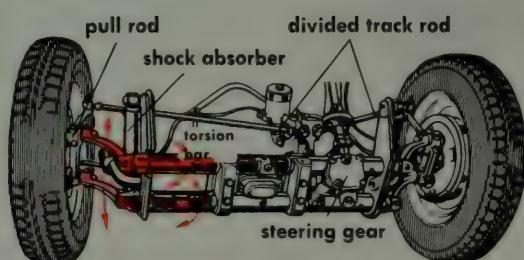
FRONT AXLE WITH TORSION BAR SUSPENSION
